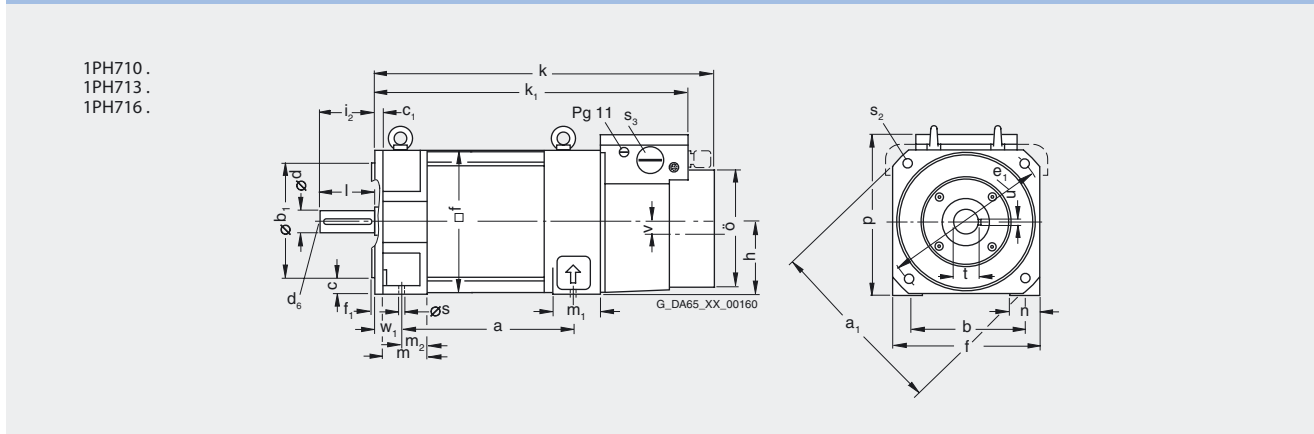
1PH7, type of construction IM B35, forced ventilation, with pipe connection, NDE
